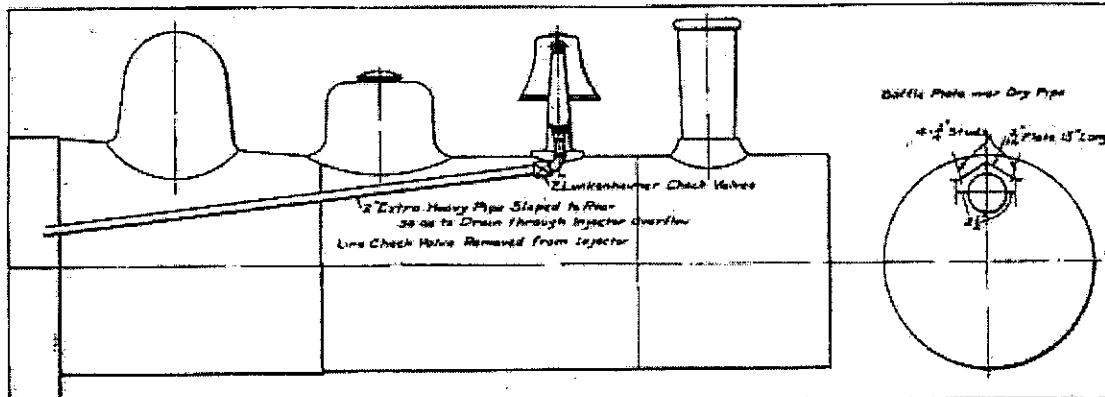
C.N.R. Standard Bell Stand Injector Arrangement.
